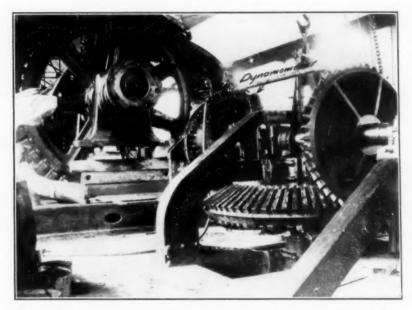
HORIZONTAL TESTING OF VERTICAL WHEELS WITH BEVEL GEARS
